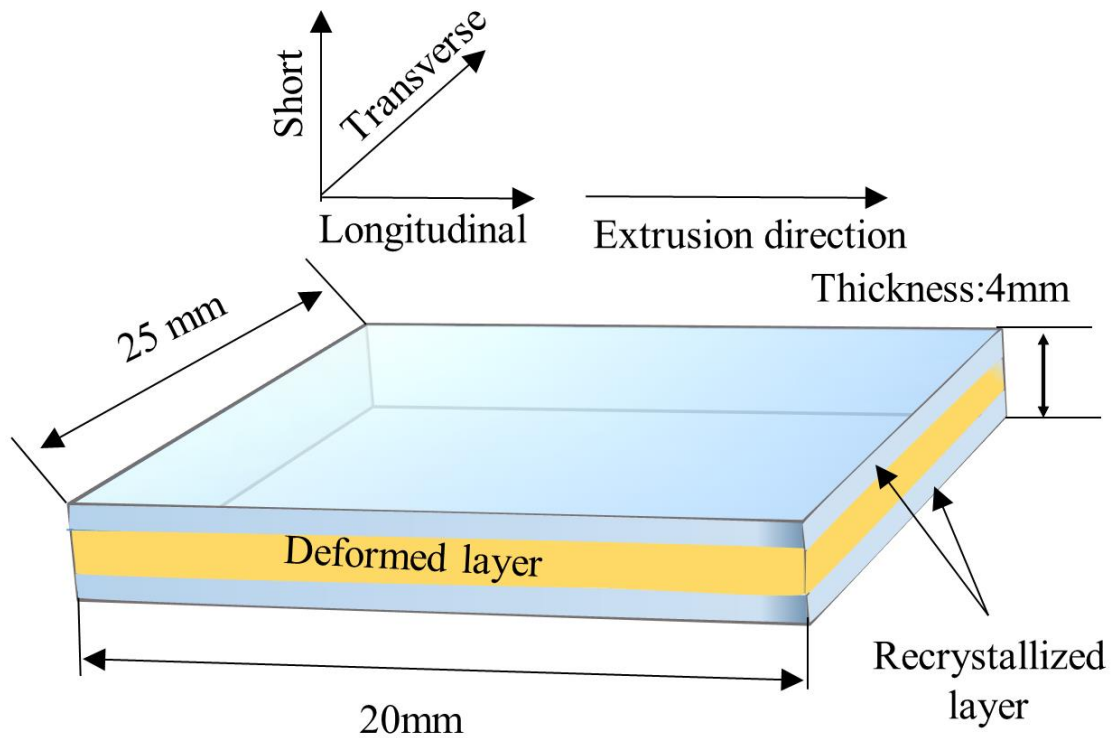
Schematic drawing of the samples used for the intergranular corrosion test.
